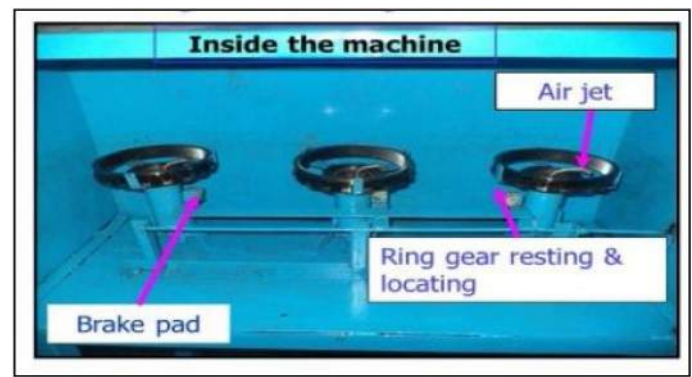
After: Ring Gear cleaning operation - Internal arrangement for better understanding
